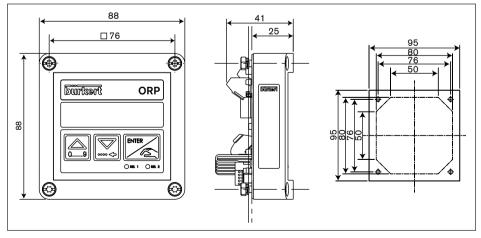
Dimensions redox transmitter 8206 panel-mounted version, and drilling jig
